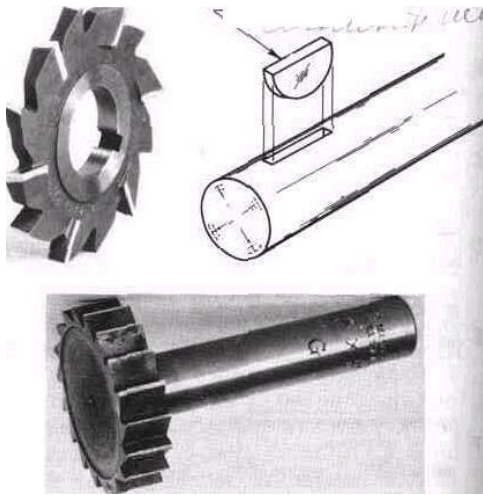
Woodruff key seat cutters and assembly drawing of a shaft, key seat, and Woodruff key.
